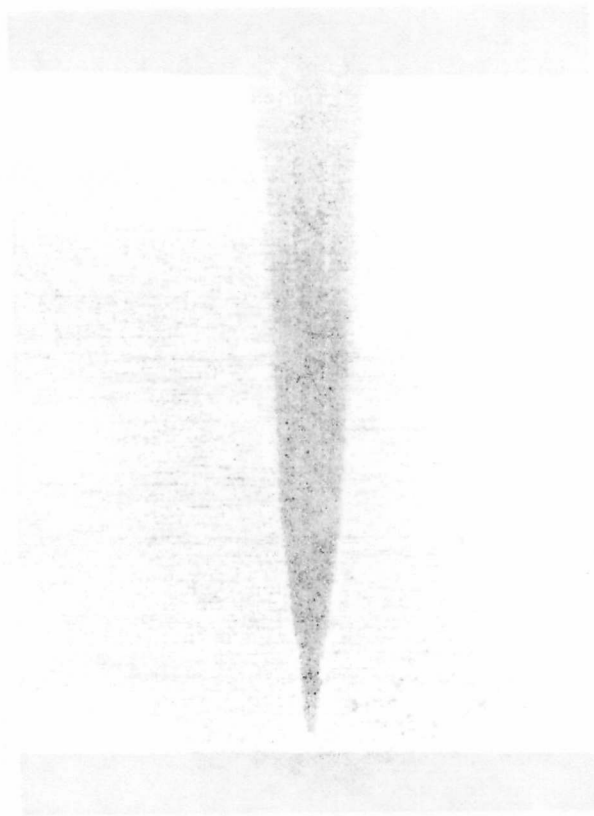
Macrostructure of electron beam weld on 15mm base plate.
